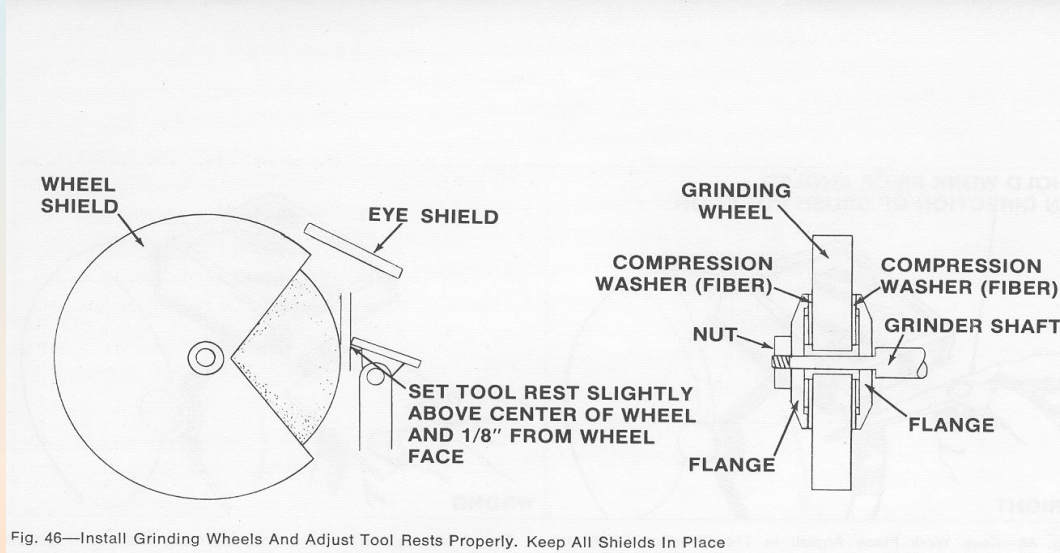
Install Grinding Wheels And Adjust Tool Rests Properly. Keep All Shields In Place
